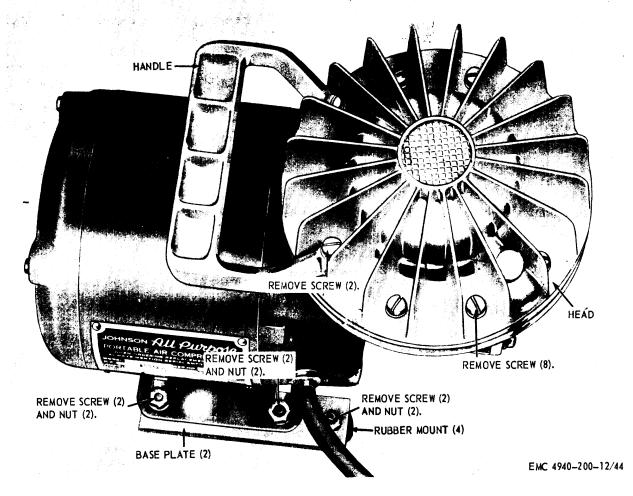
Head, handle, base plates, and rubber mounts, removal and installation.
